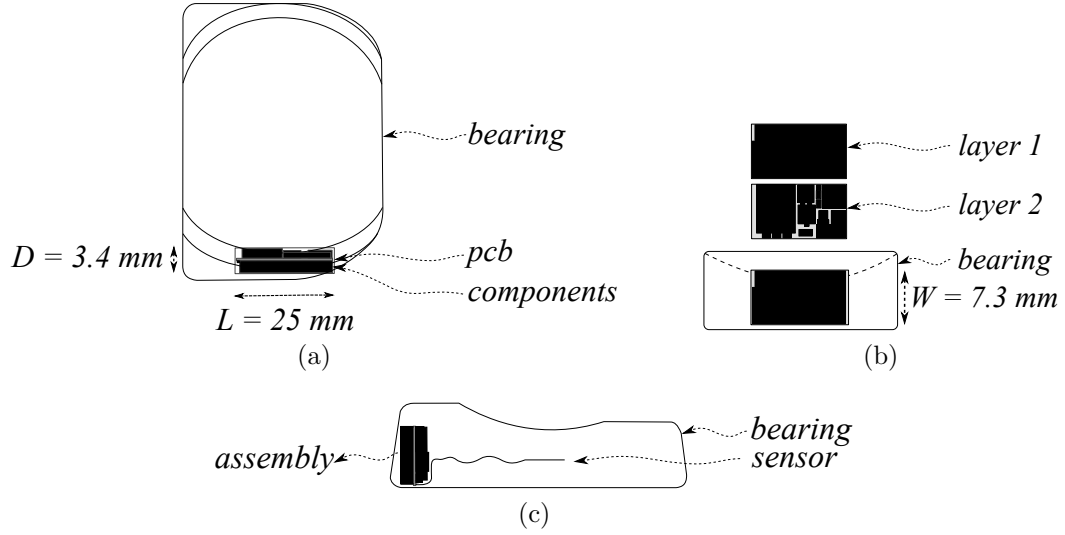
Illustration of the instrumentation assembly, top view, with all the electrical components, drawn to scale. The large module on the PCB is the ZL70321, taking up roughly the same amount of surface area and volume as all the other components.
